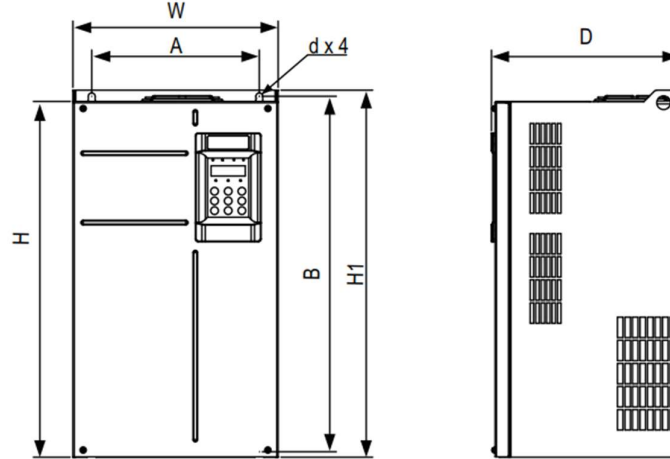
External dimensions and mounting dimensions of T7 to T9 frames models.
